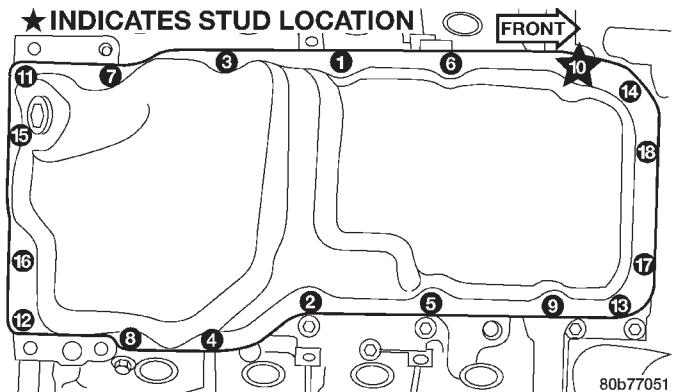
Oil Pan Mounting Bolts and Oil Pan
